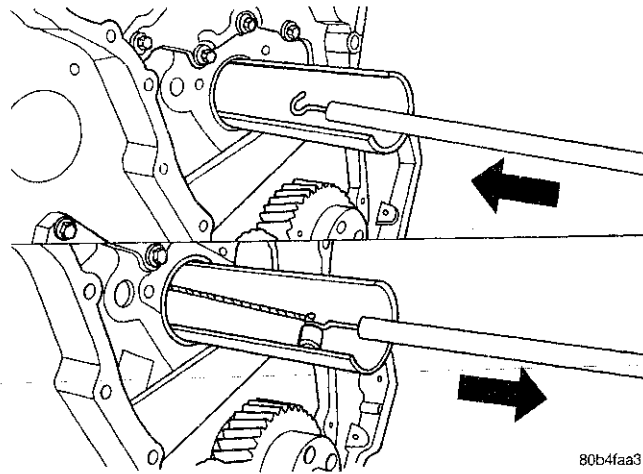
Retrieve Tappet Installation Tool through Cam Bore
